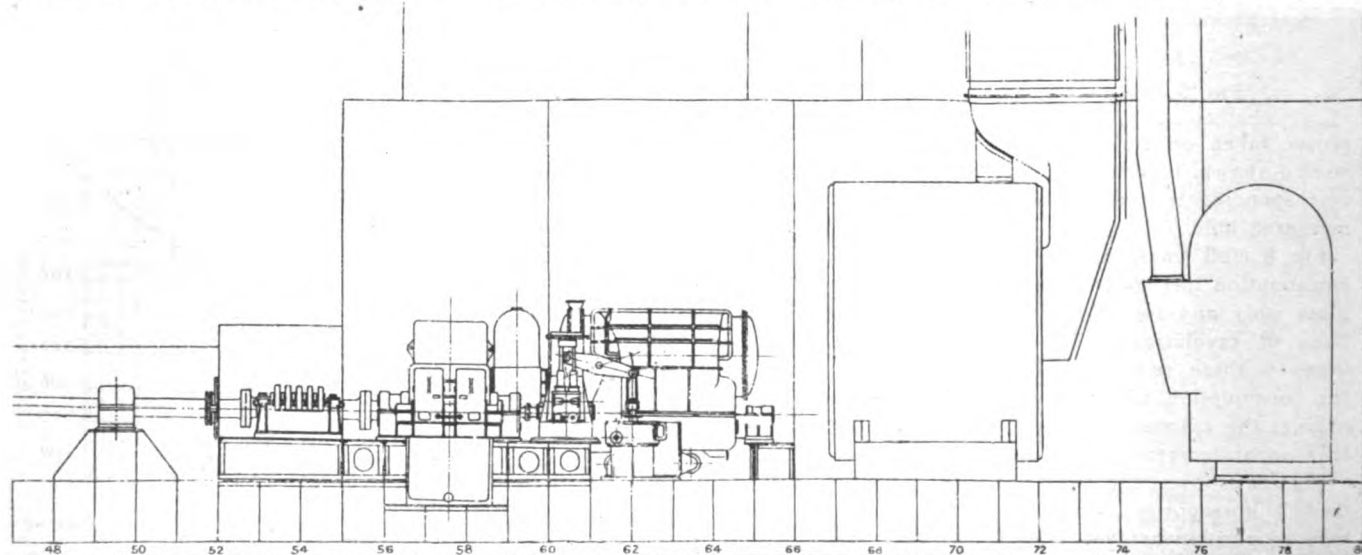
LONGITUDINAL SECTION THROUGH ENGINE ROOM. TURBINE MACHINERY.
